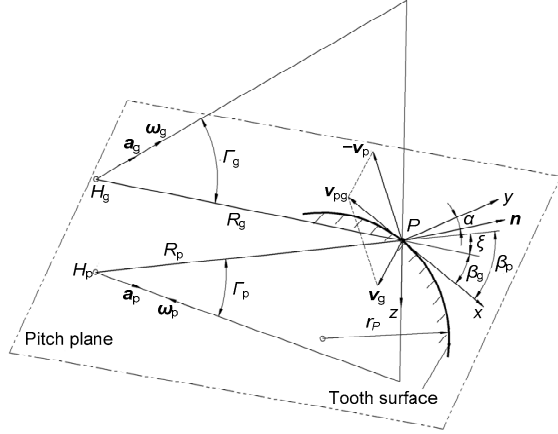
Spiral angle and pressure angle of the hypoid gear drive
